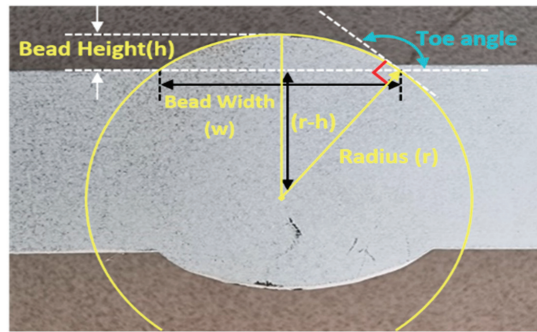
Weld bead shape of the SAW two-run method.
